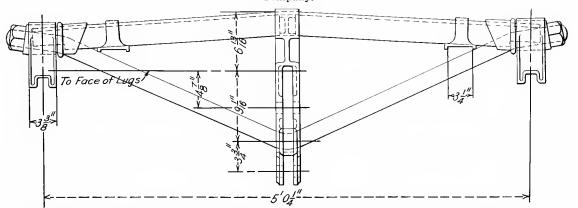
Buffalo Passenger Brake Beam for PC Equipment. Buffalo Brake Beam Company.
